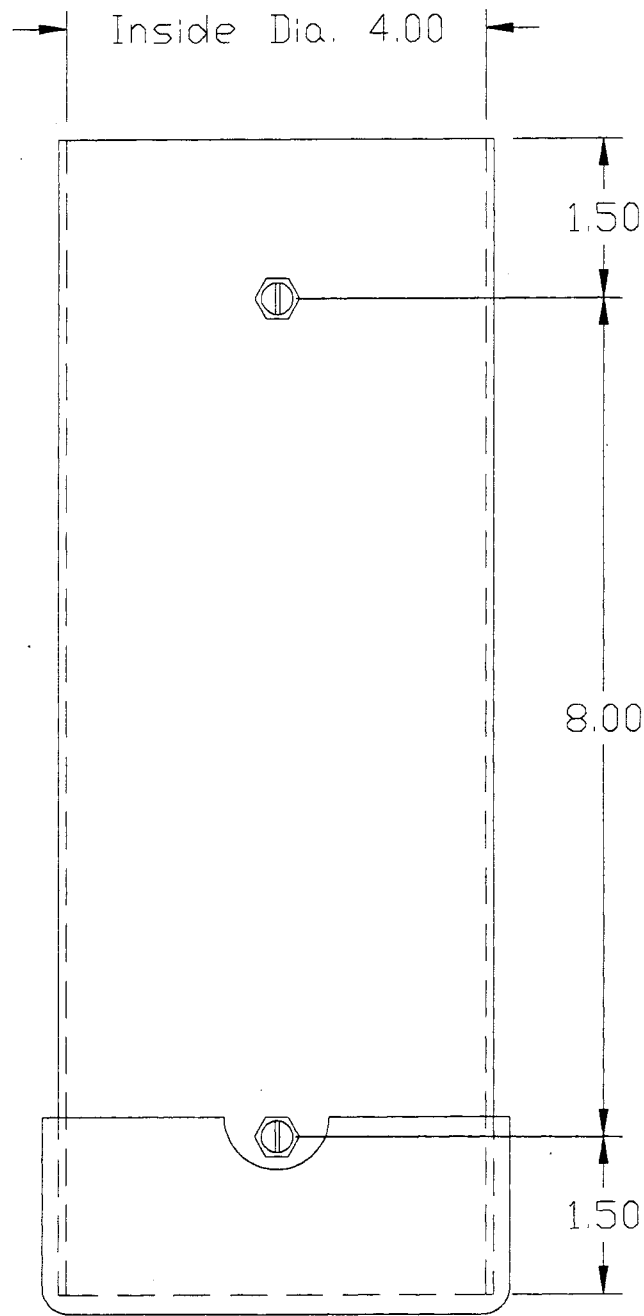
B. Side view of a PVC mold used for casting 4 x 11 in. (100 x 280 mm) creep and shrinkage specimens. Also shown are bolts used to hold brass inserts in place during casting of concrete.
